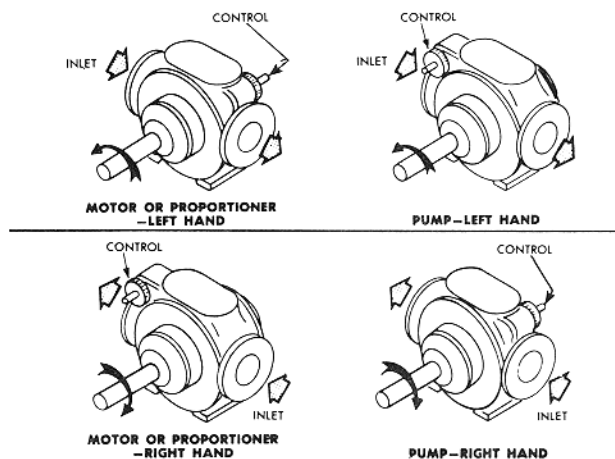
Direction of Rotation (Viewing Drive Shaft Side).
